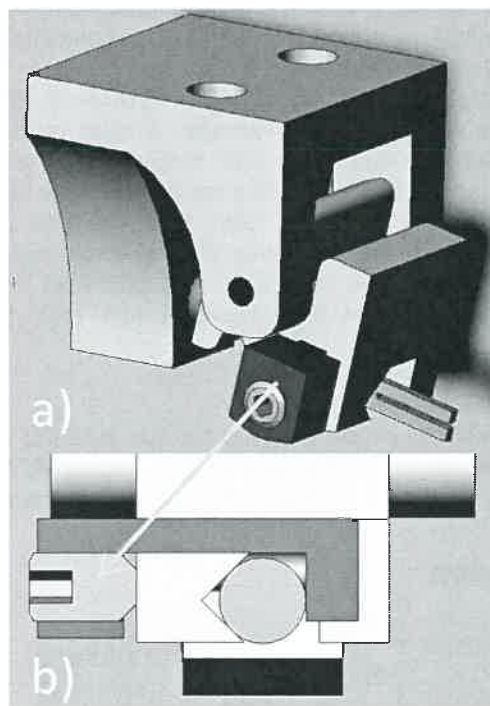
Solid model of coarse/fine adjustment mechanism for the proximity sensor, a) isometric view, b) cross section through the probe clamp mechanism.
